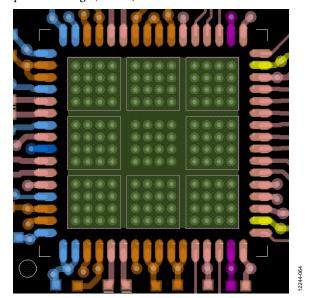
Recommended PCB Layout of Exposed Pad for the AD9234
